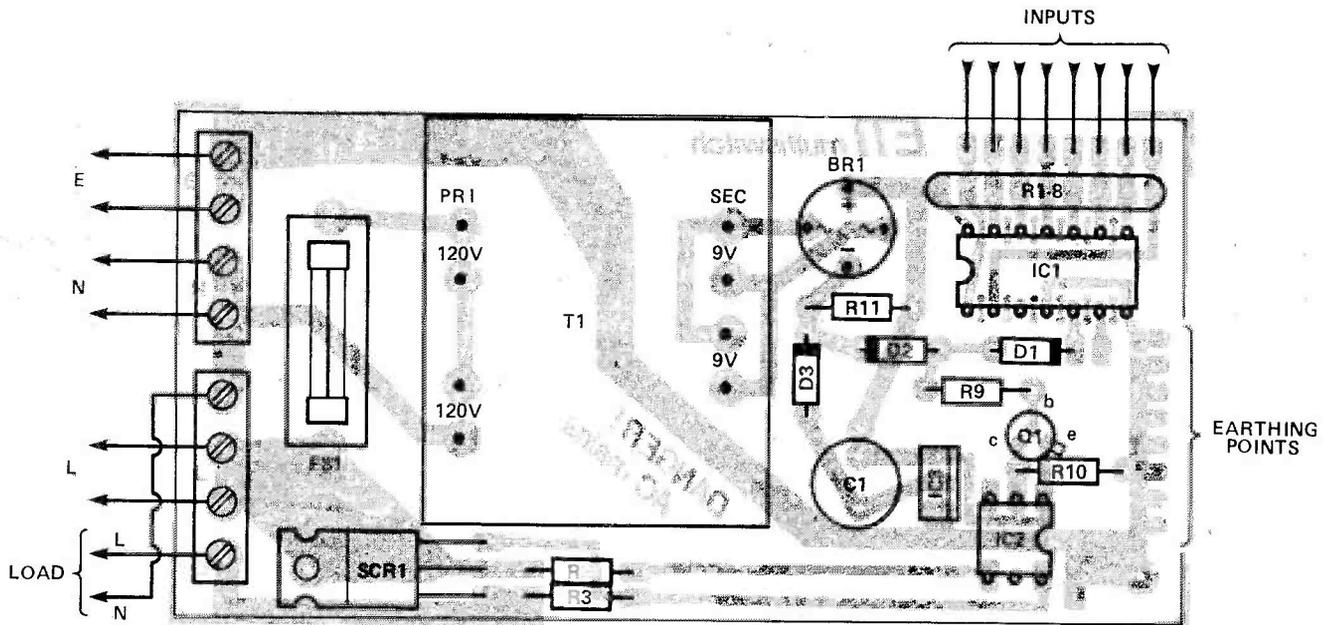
Overlay diagram of the thingummy. Note that R11 gets a little warm and should be mounted standing slightly proud of the board.
